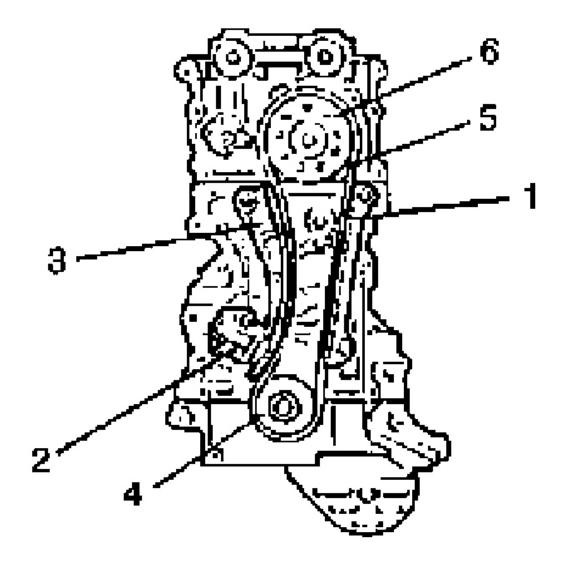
Removing Crankshaft Timing Sprocket Courtesy of SUZUKI OF AMERICA CORP.
